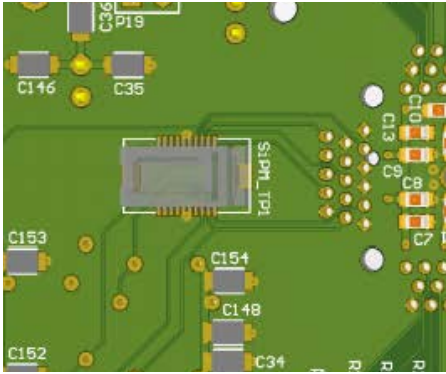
Multipurpose SiPM connector at the bottom side of the board.
